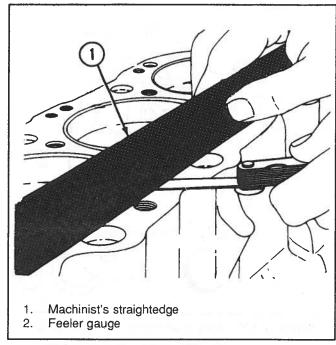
Checking Cylinder-Head-Gasket Surfaces For Warping
